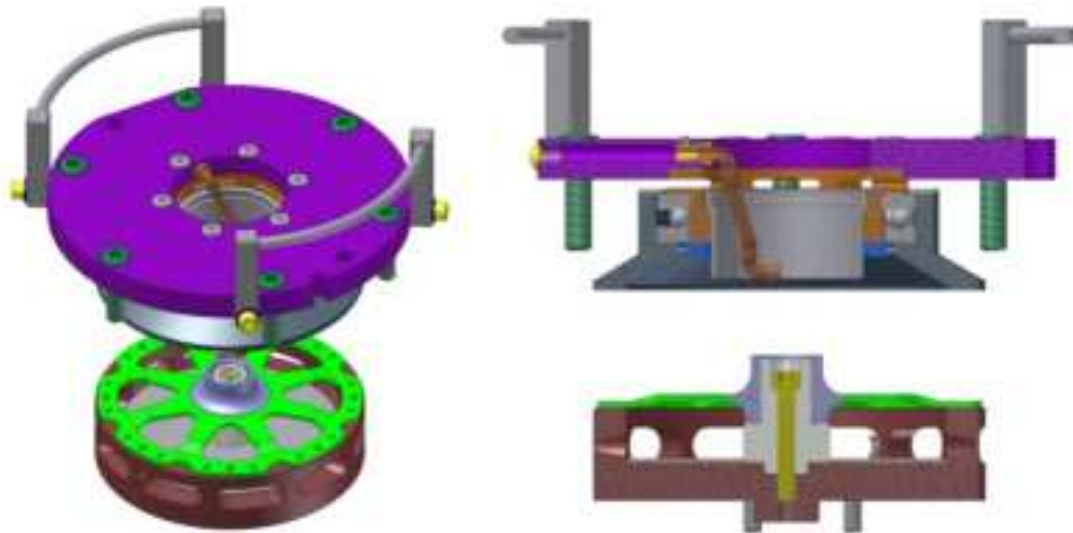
Fixture for laser welding of clutch disc assemblies for automotive transmission systems
